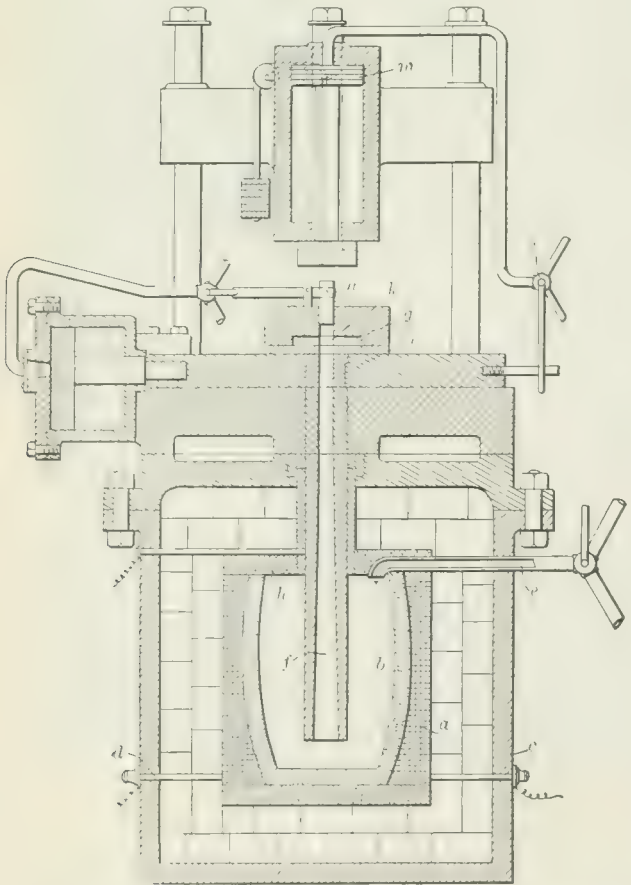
A Modern Pneumatic Die Casting Machine in Which the Metal Is Kept Melted by Electricity.
